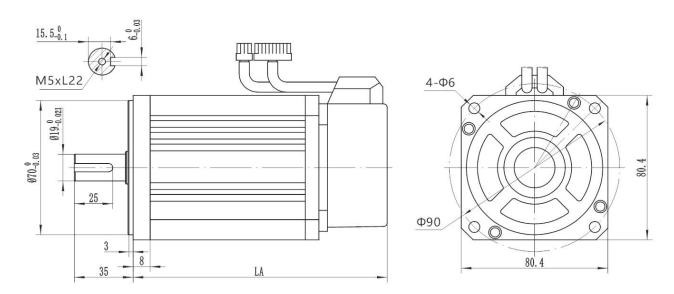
Installation dimension drawing of WE series 80 flange servo motor
